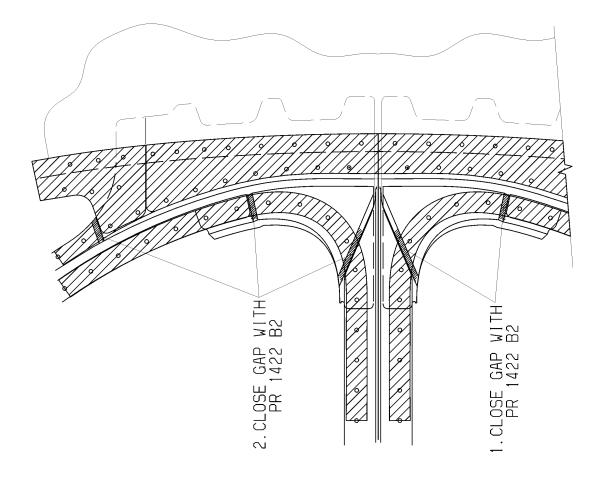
Windshield with "GORE" Seal - Removal/Installation (Sheet 1 of 4)
